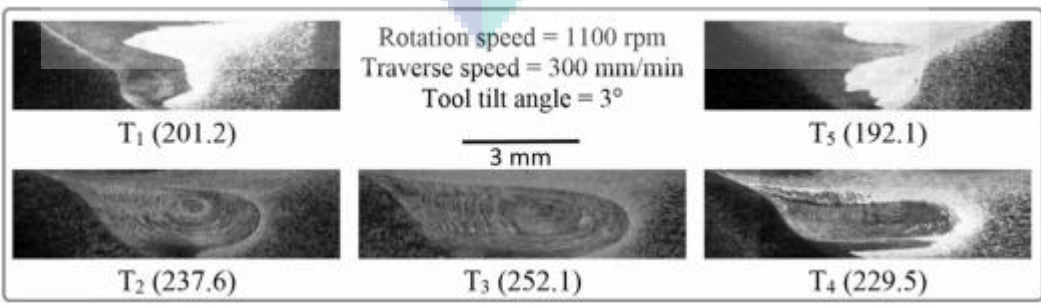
Macrographs of the weld nuggets and the ultimate tensile strength (UTS, MPa) for the five tools. The AA6061 is placed on the left-hand side of each photo (AS)
